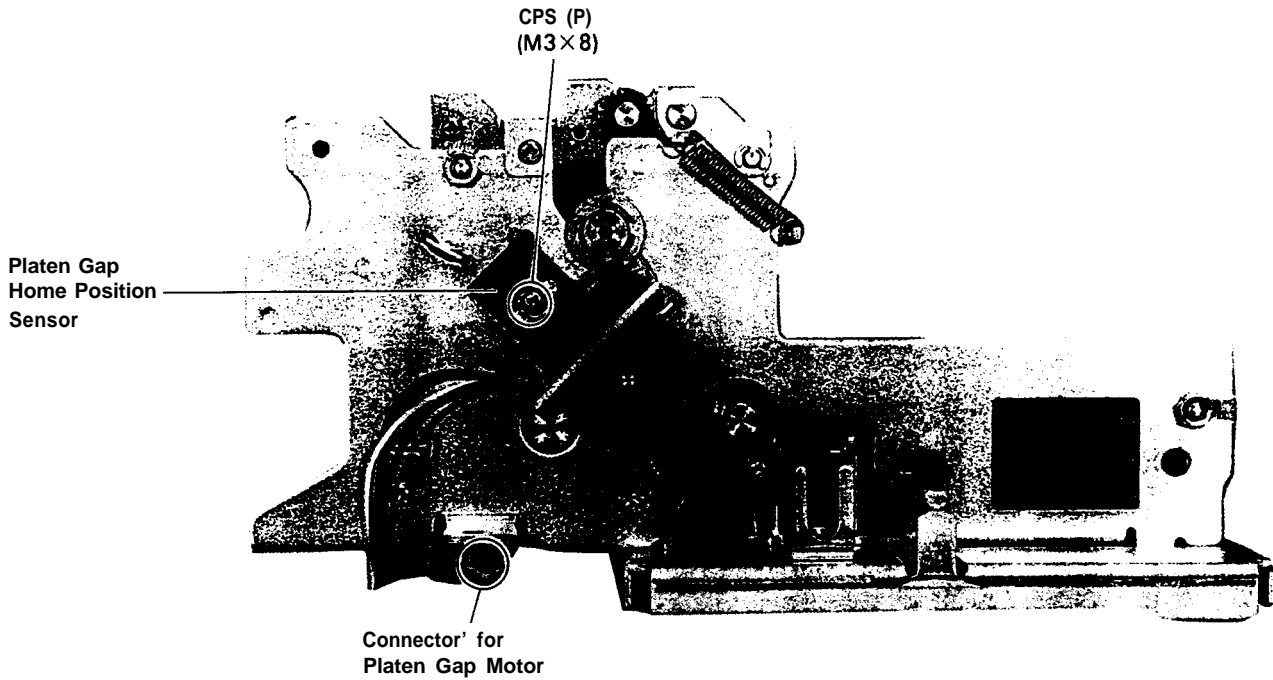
Platen Gap Home Position Sensor Assembly Removal
